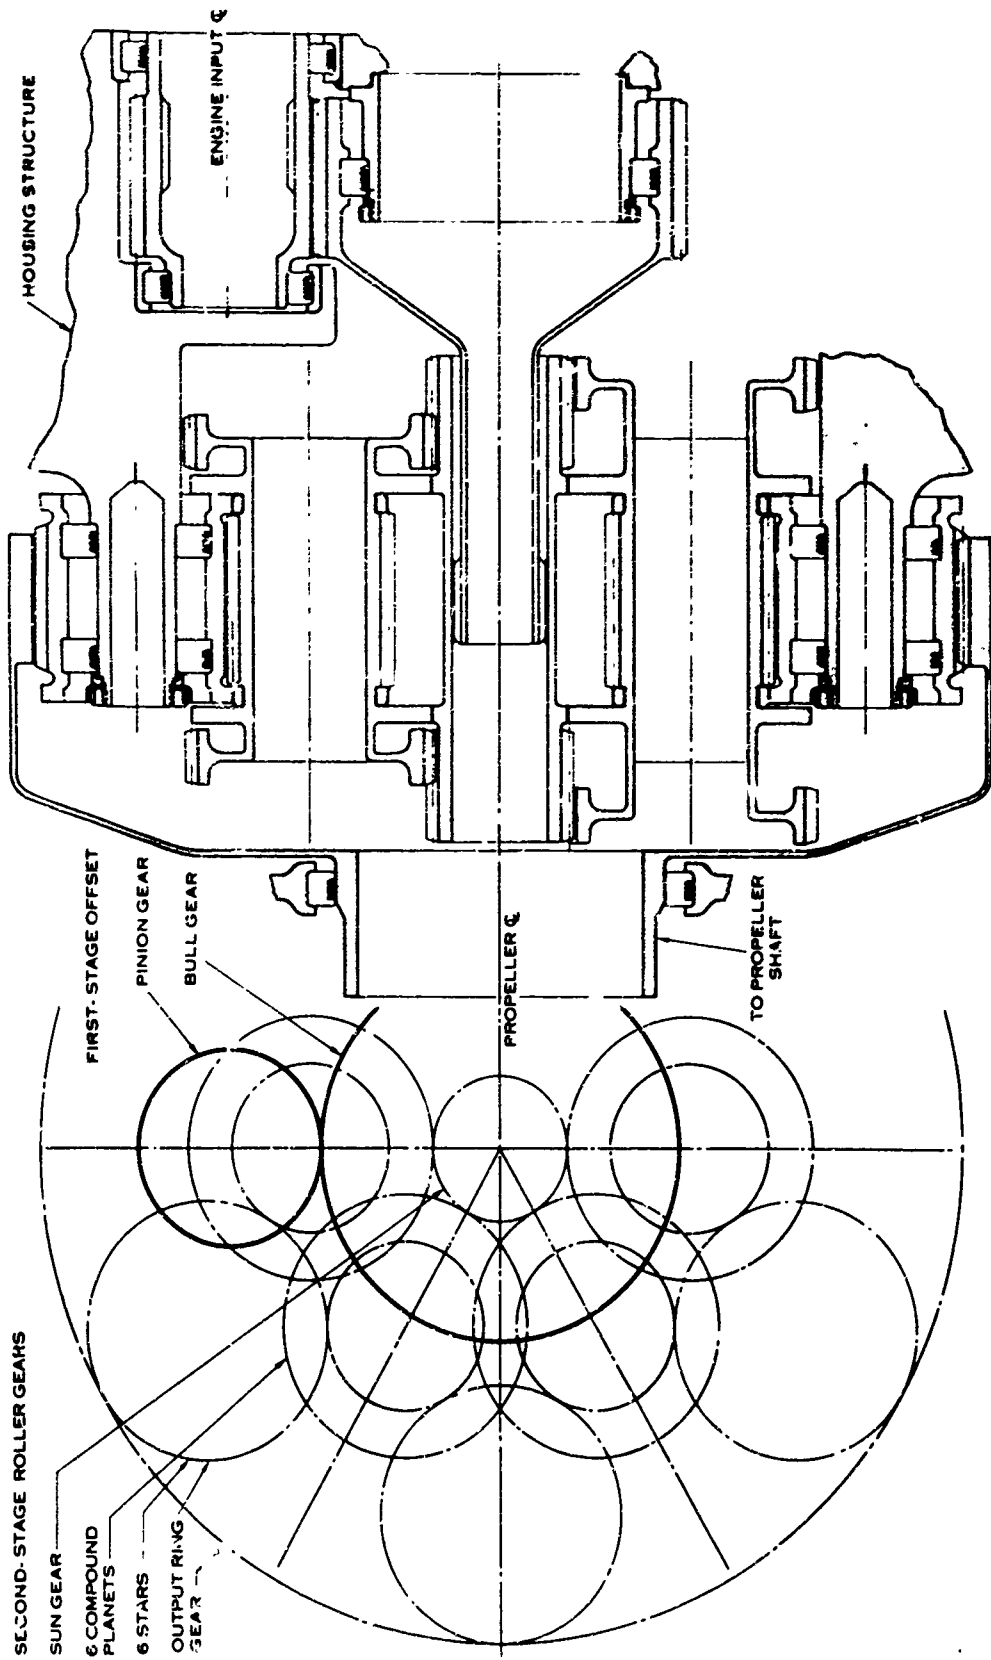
ROLLER GEAR TRAIN WITH OFFSET
